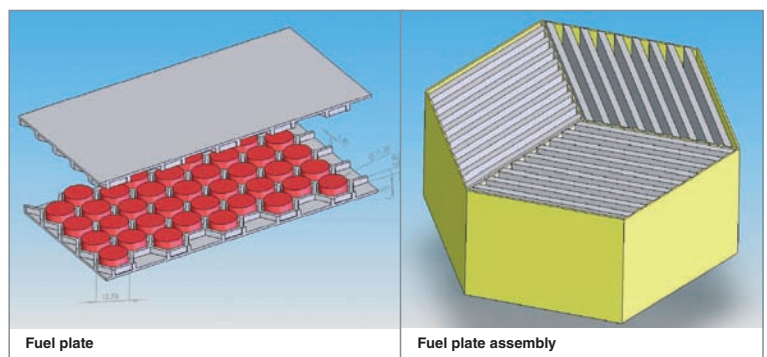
Schematic view of the GFR fuel plate and fuel assembly.
